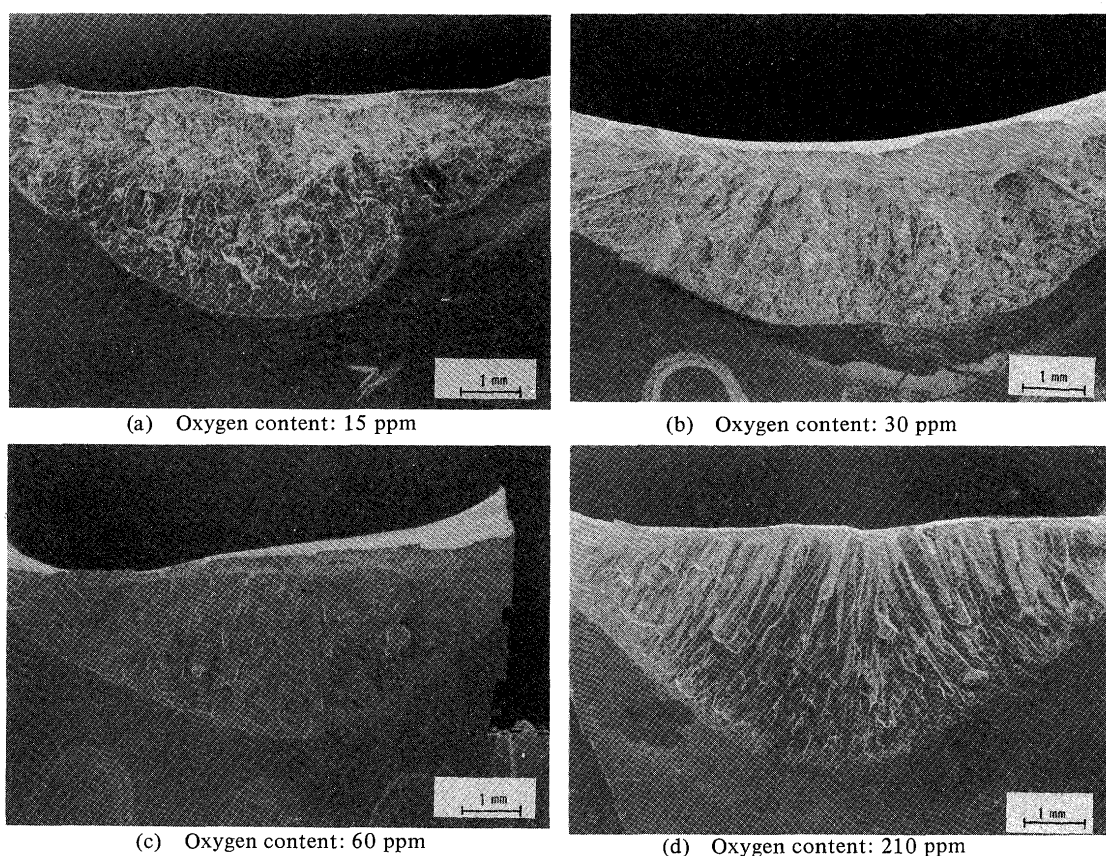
Effect of oxygen content in weld metal on macrofractograph of root crack in weld metal in the LB-TRC test
